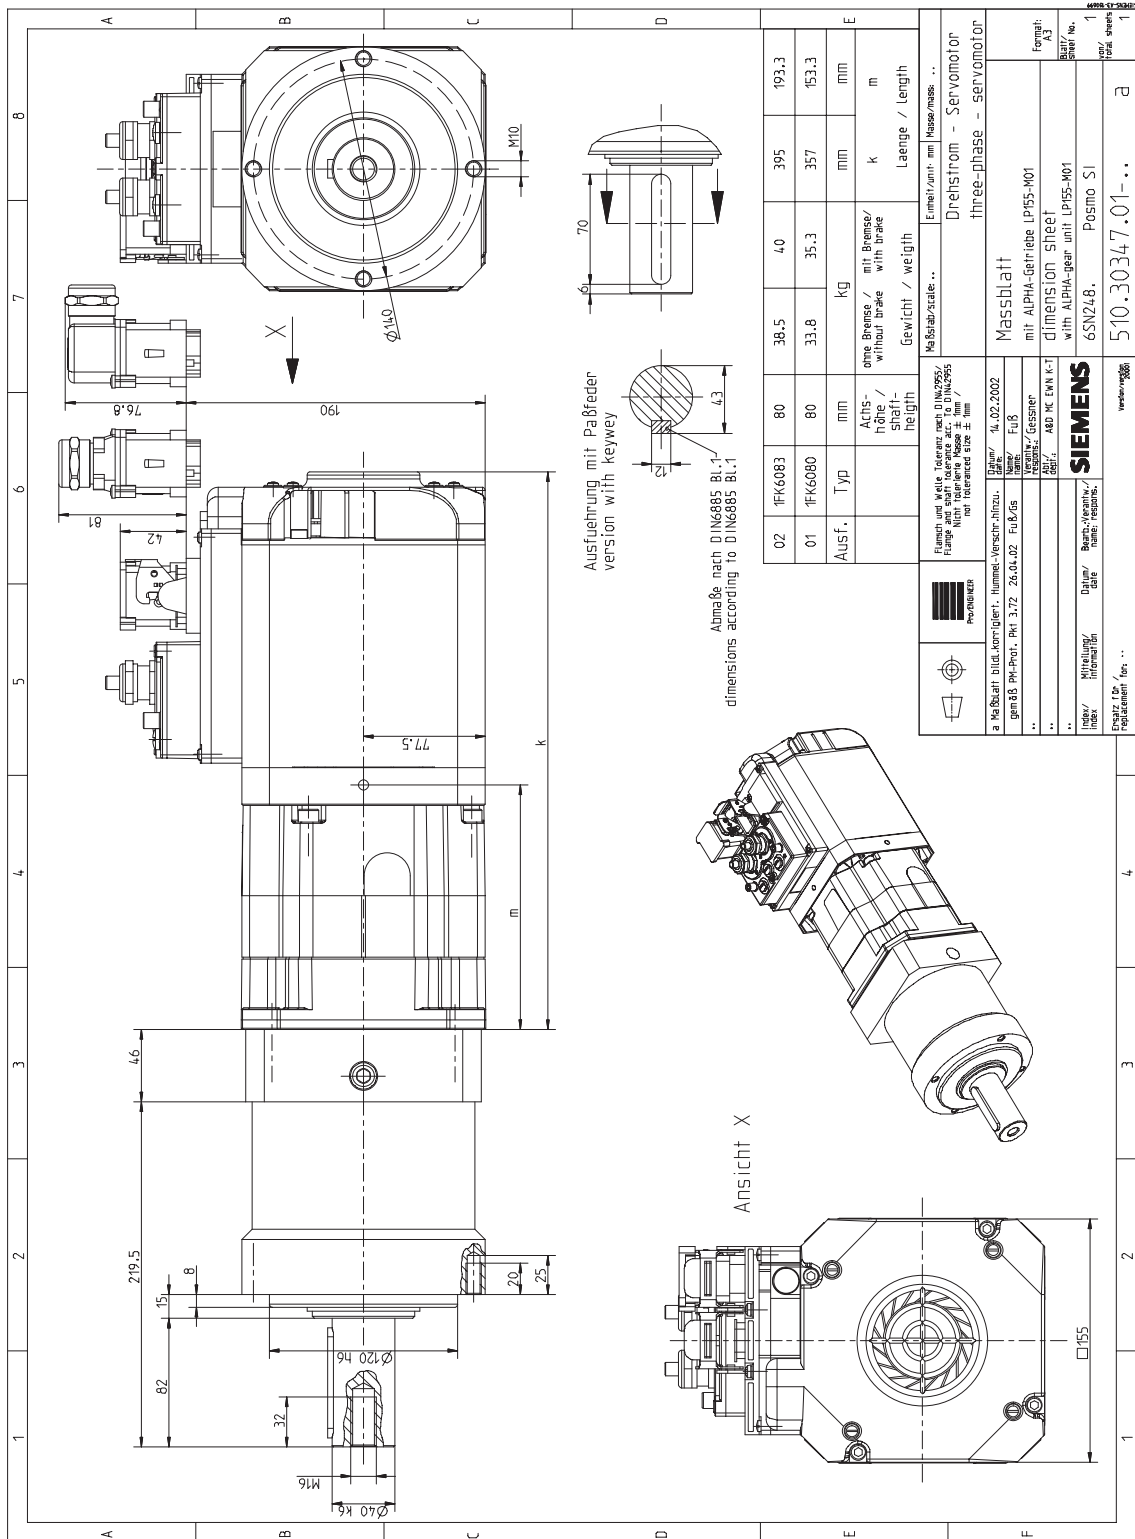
Dimension drawing POSMO SI 6SN248-2CF00-0G with gearbox LP155-M01
